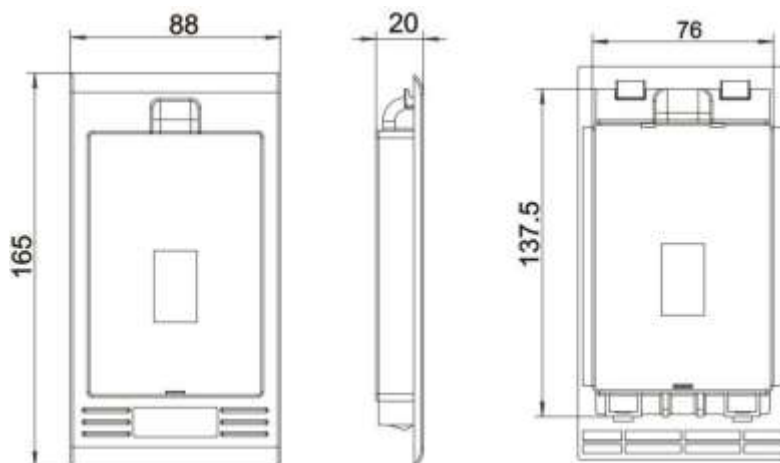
Operation panel mounting dimensions(0.75-800kw)
